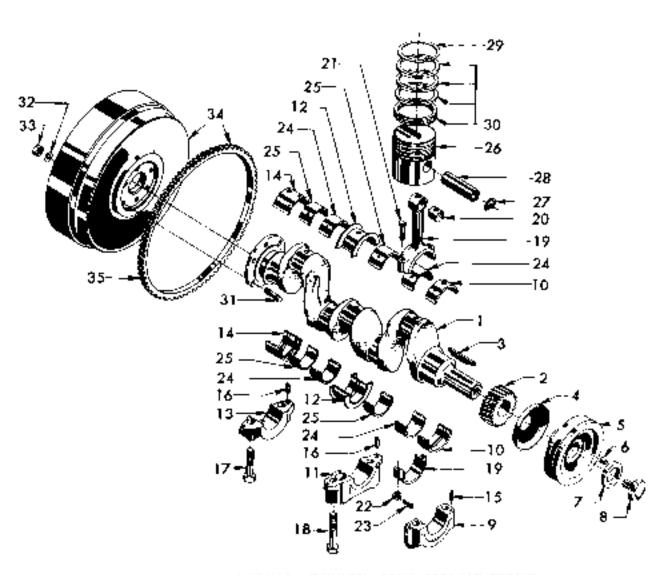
A - CRANKSHAFT, FLYWHEEL, CONN. RODS AND PISTONS
